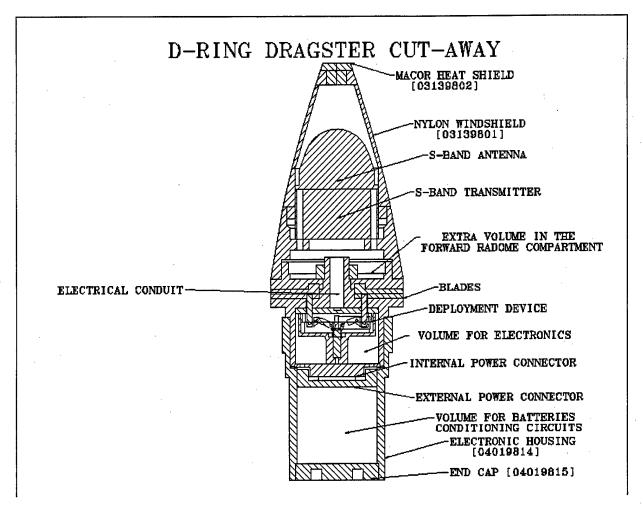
Electro-Mechanical Assembly of the Range Corrector, Gun-Launched Prototype.
